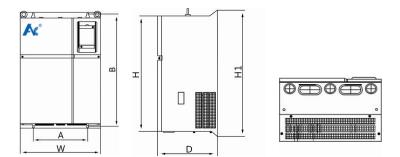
Physical appearance and overall dimensions of AC900 (sheet metal housing)
